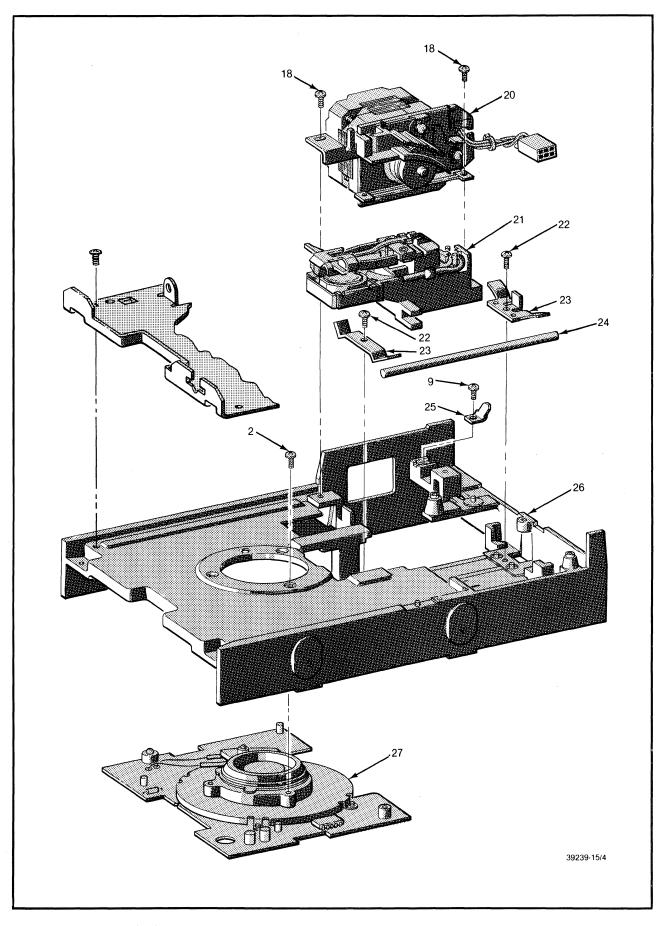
455/465 BASIC DRIVE ASSEMBLY (SHEET 4 OF 4)
